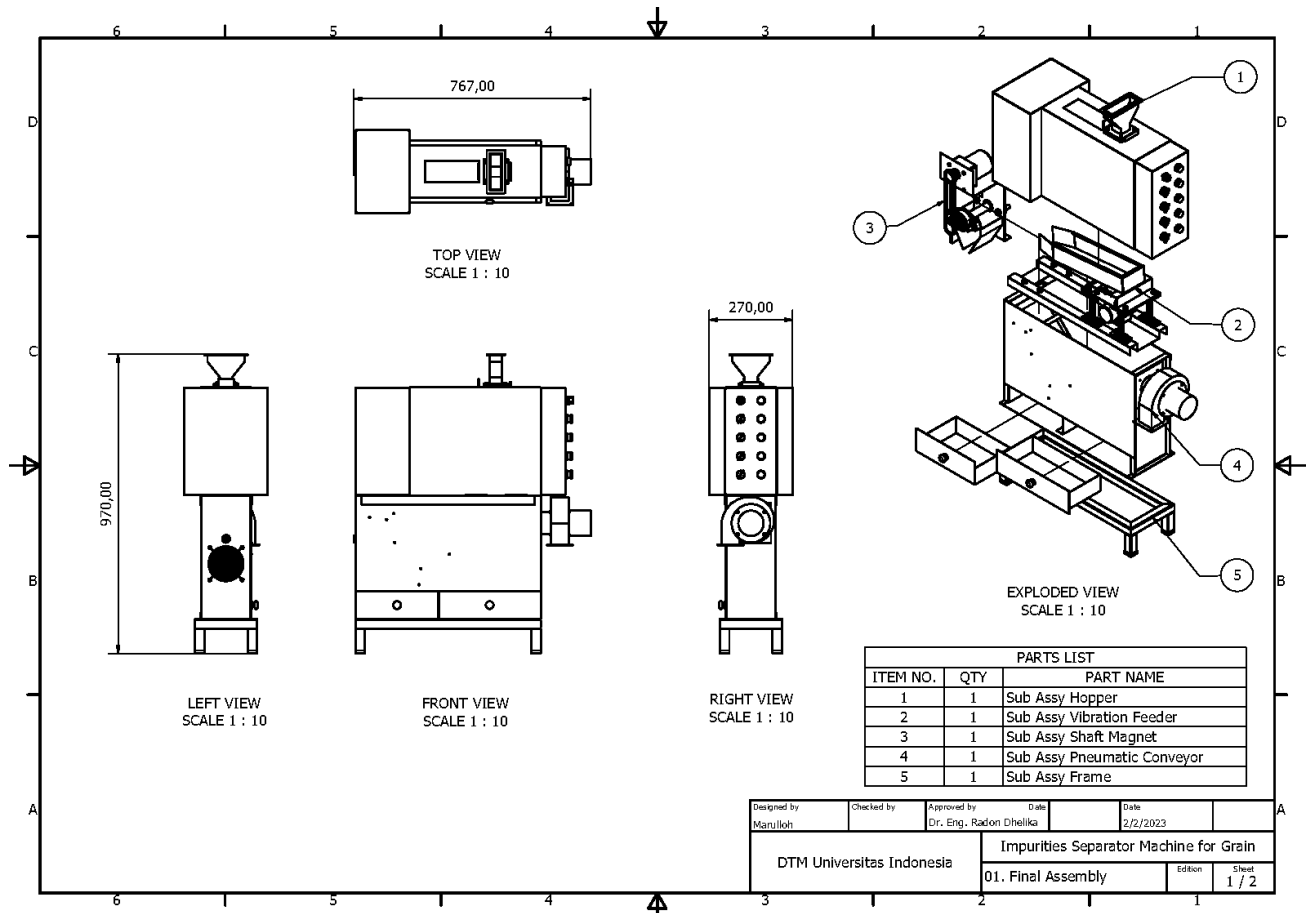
Technical drawing for final assembly of paddy grain cleaner
